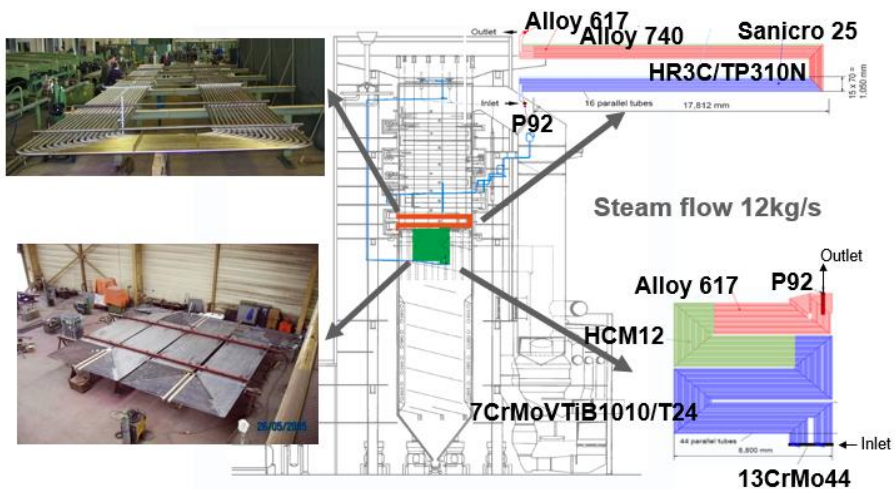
COMTES700 In-plant testing of furnace panels and superheaters in an existing boiler.
